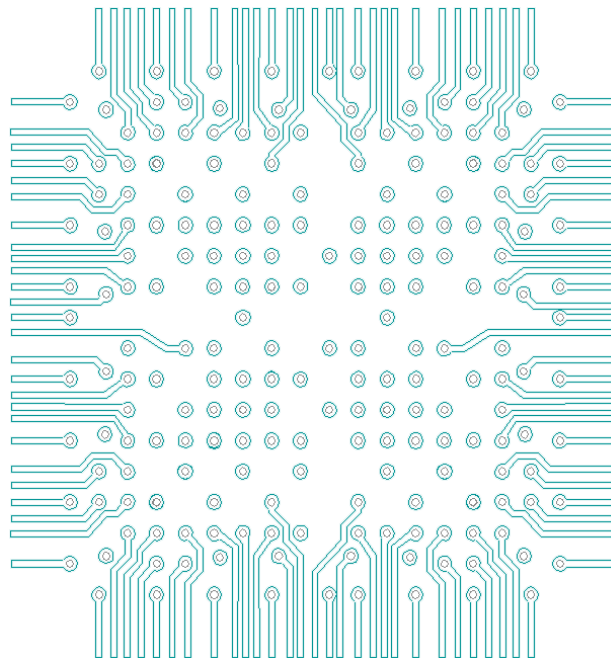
• Suggested Board Layout of Soldered Pads for CS196 CSPs (PCB Lower Layer)
